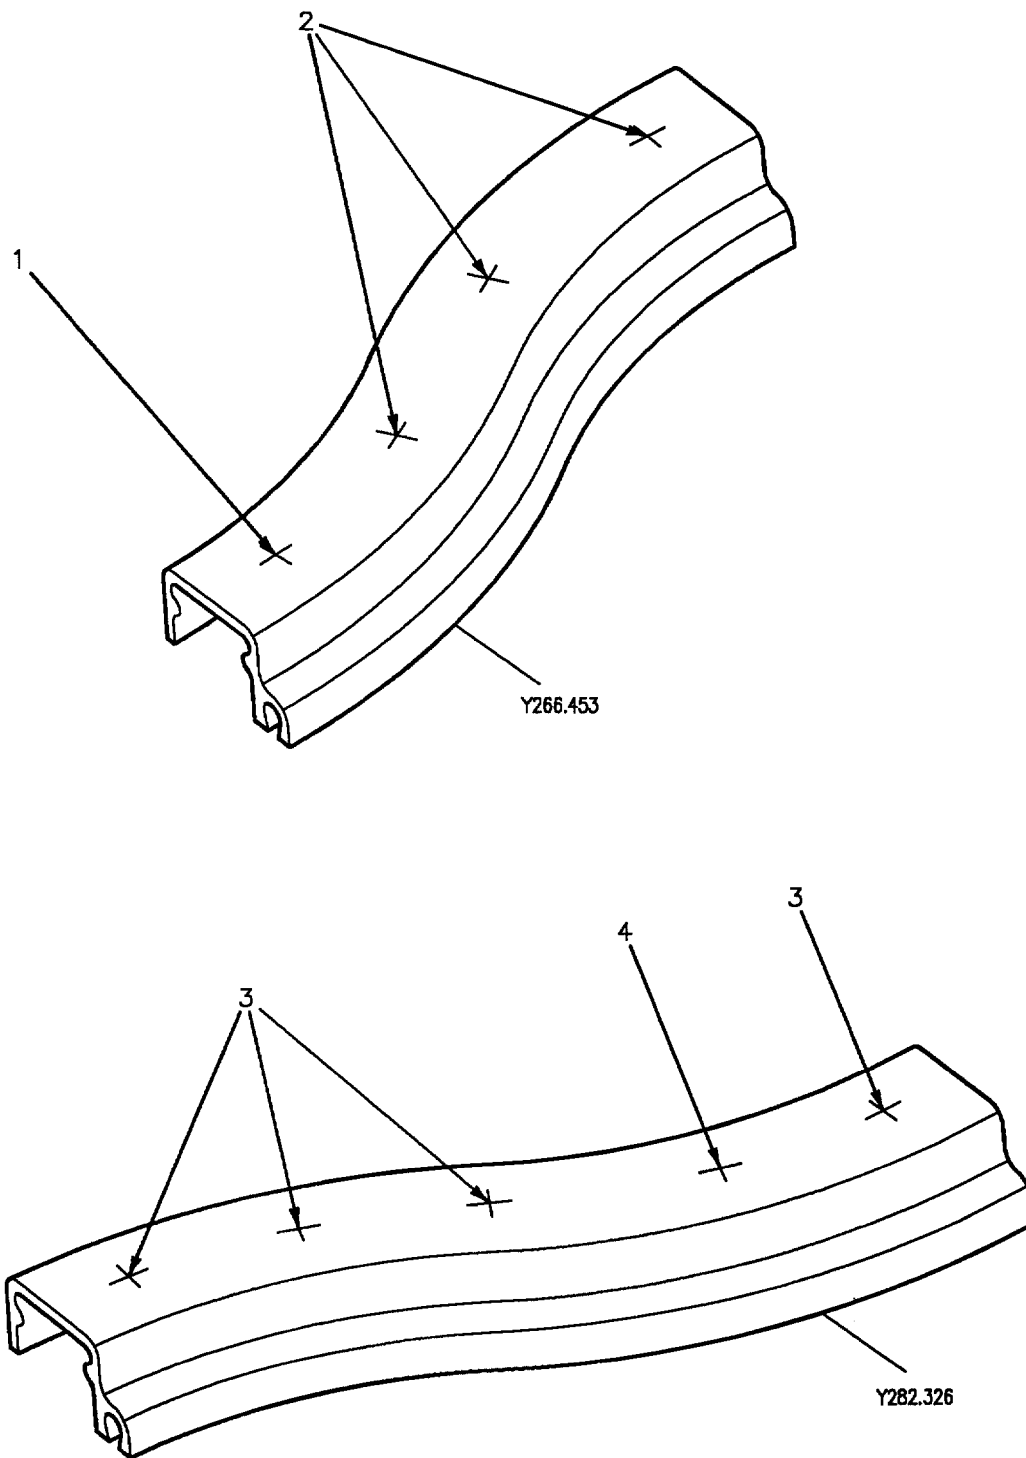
Seal Retainer, 74A350864, Fastener Index (Sheet 1)
